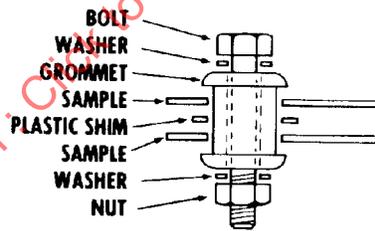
TYPICAL RUBBER GROMMET ASSEMBLY
